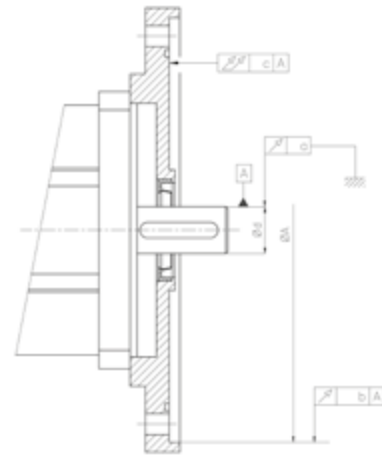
Required tolerances of the T series / Erforderliche Toleranzen T Baureihe
